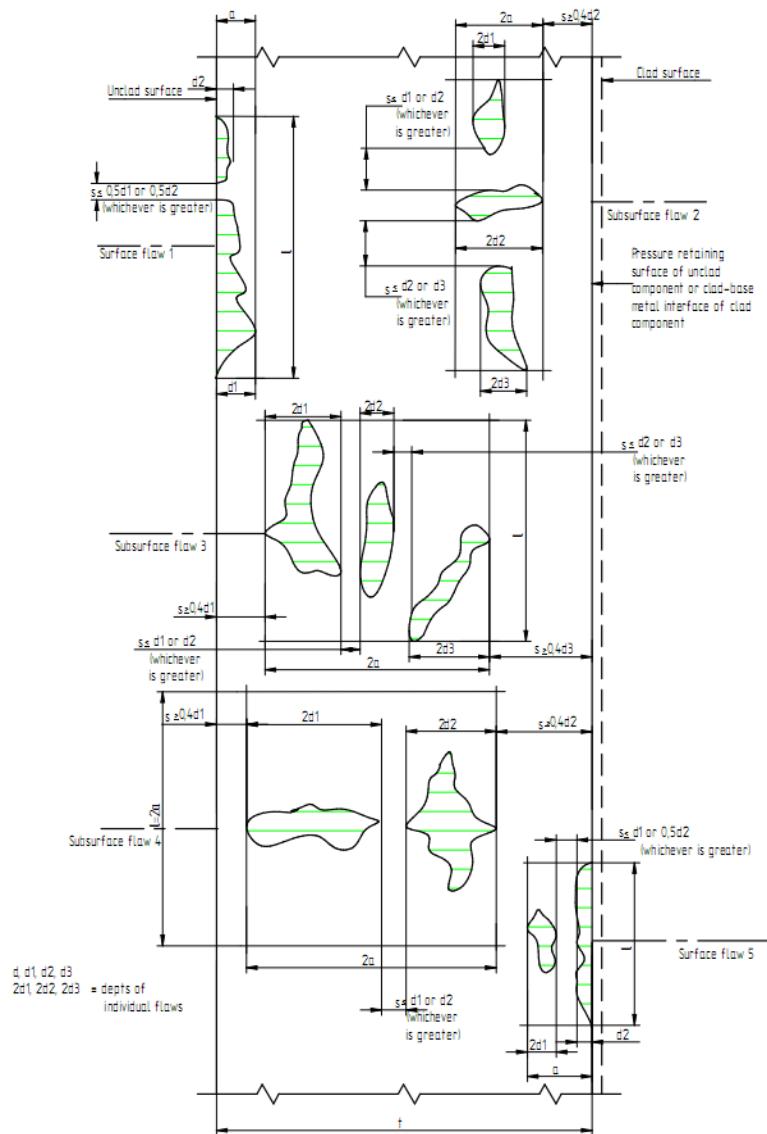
Embedded (subsurface) planar flaws oriented in plane normal to pressure retaining surface
